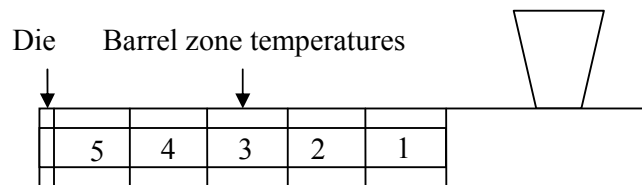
Cross-sectional view of the extruder with five separate heating zones.
